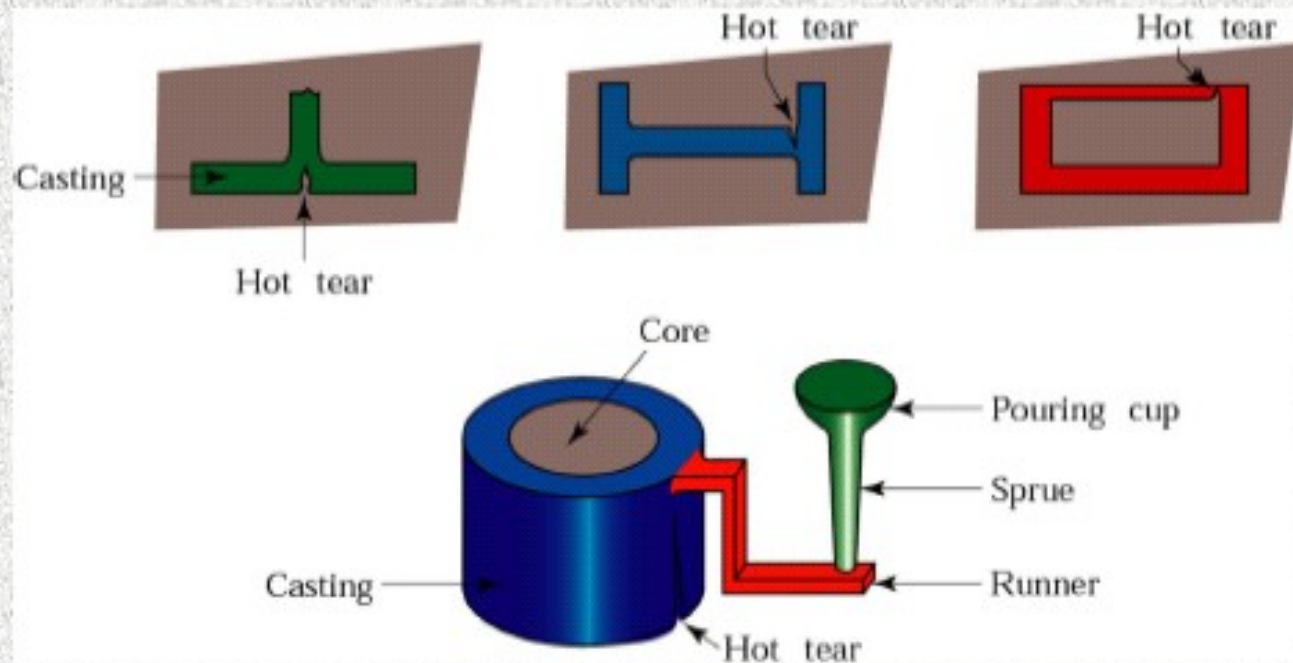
Examples of hot tears in castings. These defects occur because the casting cannot shrink freely during cooling, owing to constraints in various portions of the molds and cores. Exothermic (heat-producing) compounds may be used (as exothermic padding) to control cooling at critical sections to avoid hot tearing.
